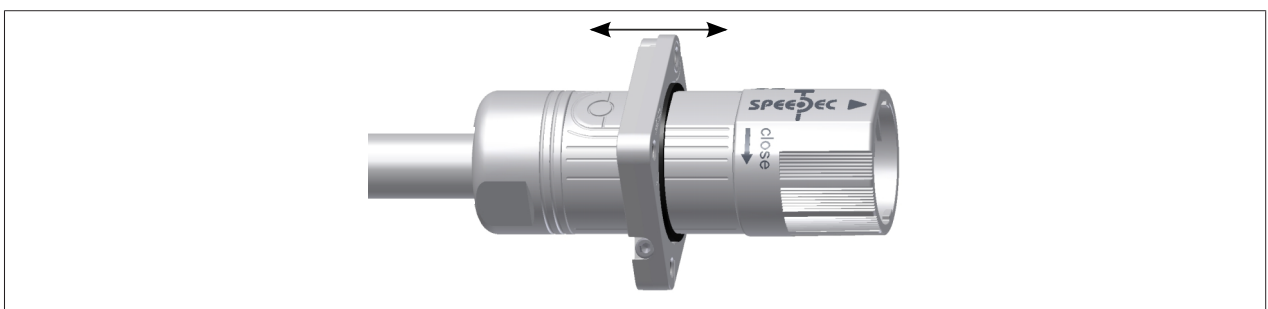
Attaching the metal flange to the connector (rear panel installation)
